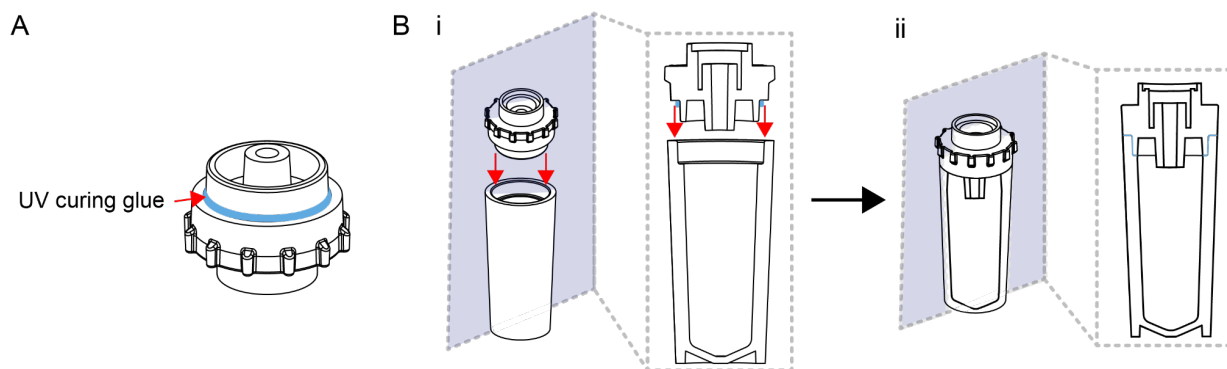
Fabrication of stabilizer tube. A) Location where UV curing glue (blue) is applied to the adapter piece. B) Mating of the adapter piece with the vial piece showing location of the glue before (i) and after (ii) inserting the adapter piece into the vial piece. Glue is then cured with a 405 nm UV lamp as described in the materials and methods.
